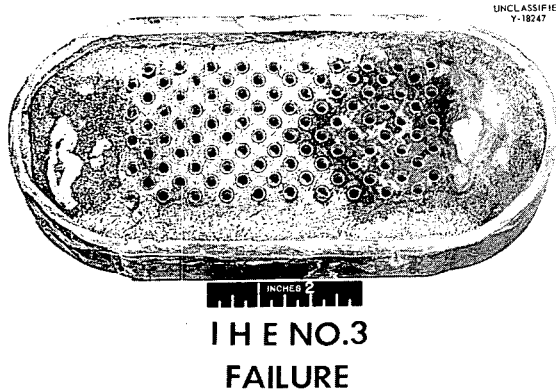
Bottom Side of IHE No. 3, NaK Inlet Head, Showing Dark Reaction Product.
